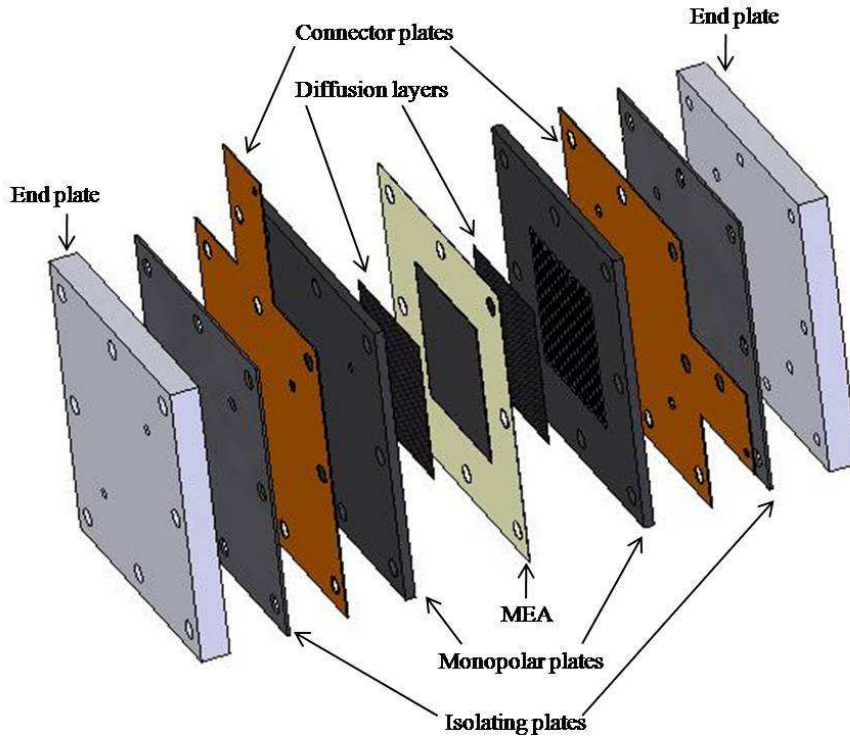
3D CAD drawing of the active feed DMFC.
